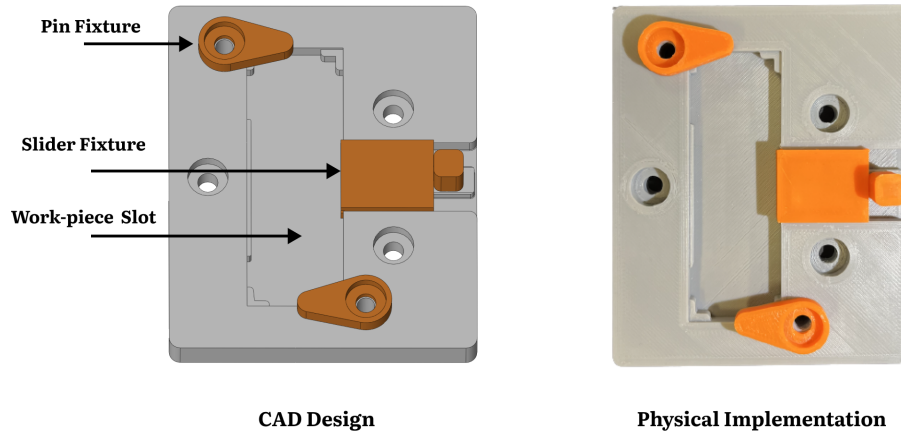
The 3D printed design and physical implementation of Workpiece Holder.
